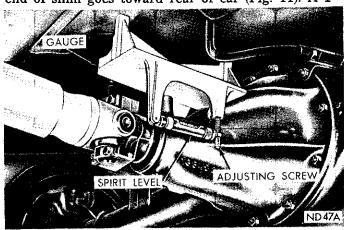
Adjusting Gauge on Differential (Rear Joint Angle Reference)
